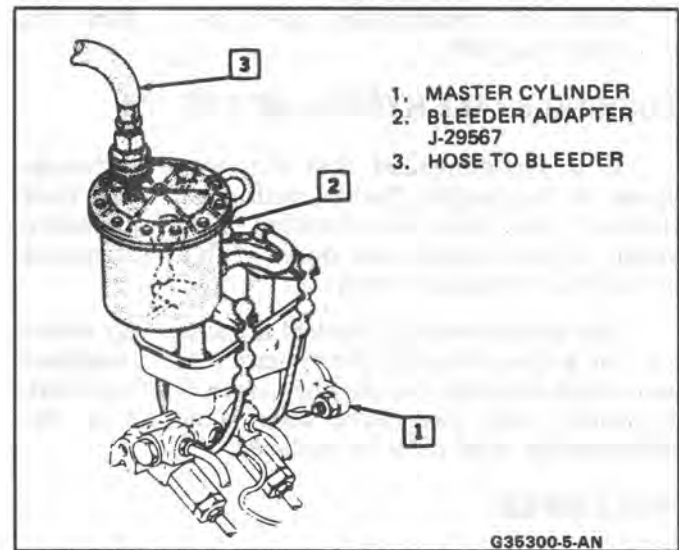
Plastic Reservoir Master Cylinder Pressure Bleeder Adapter
